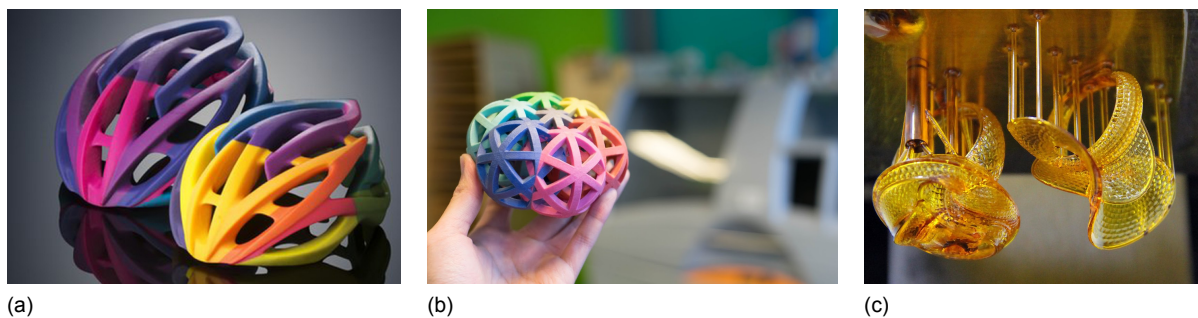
AM parts in full colour: a) helmet printed using fused deposition modelling [76], b) organic shape printed in sandstone with binder jetting [77], c) organic shape printed with support structures using vat polymerisation [78].
